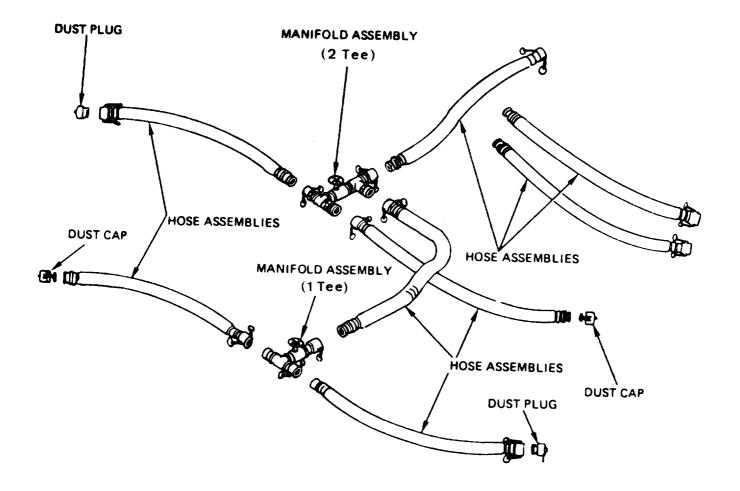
Typical Hose Manifolding (10,000 Gallon Tank)
